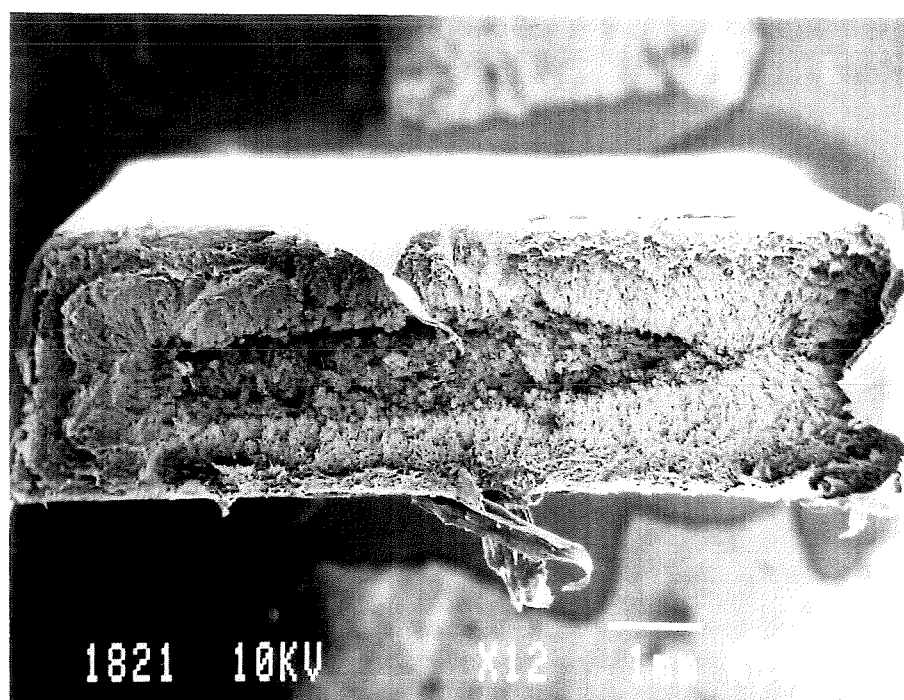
Micrograph of non-compatible (NC) blends type I specimens. Fracture surface at the weldline. General view perpendicular to flow
